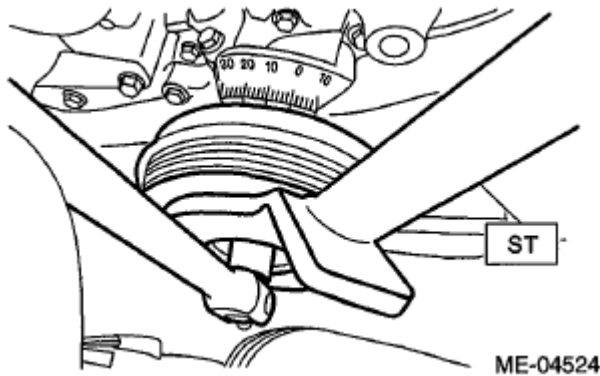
Installing Crank Pulley Using Crank Pulley Wrench
